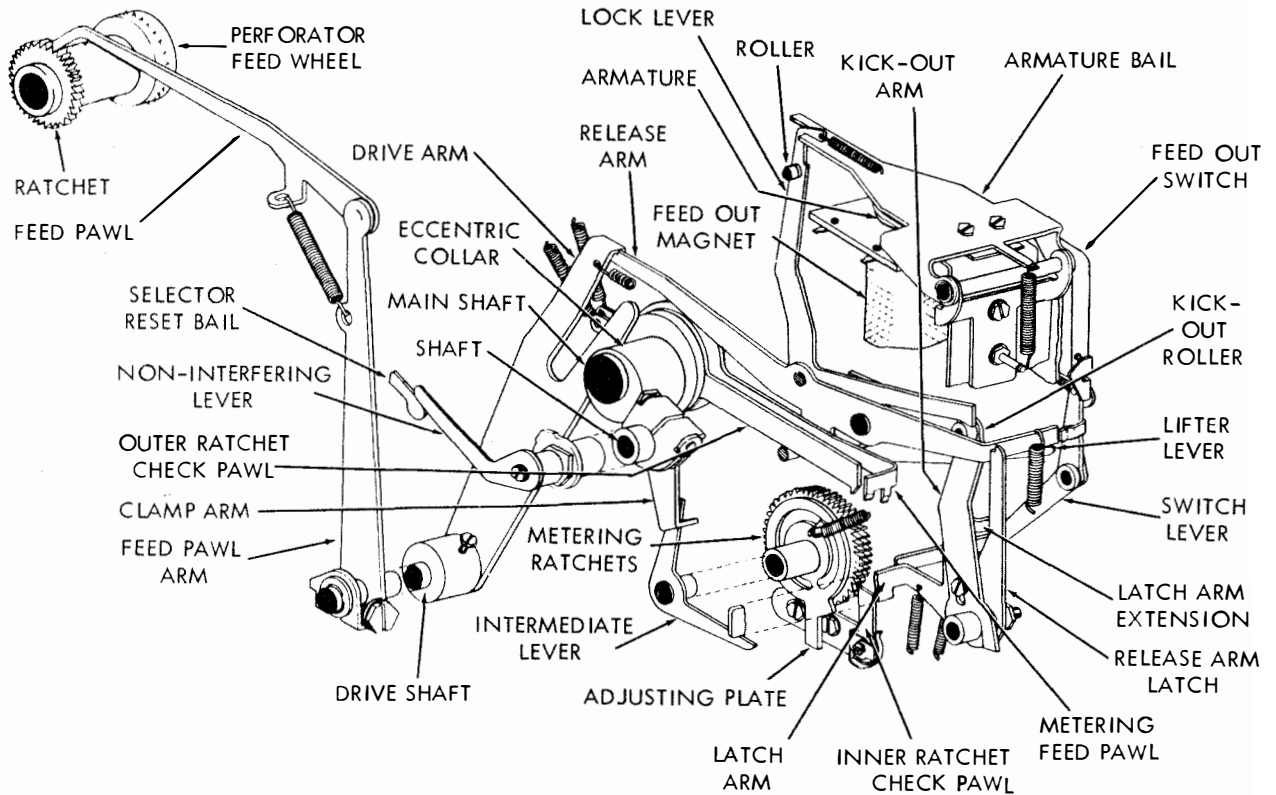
Non-Interfering Blank Tape Feed-Out Mechanism
